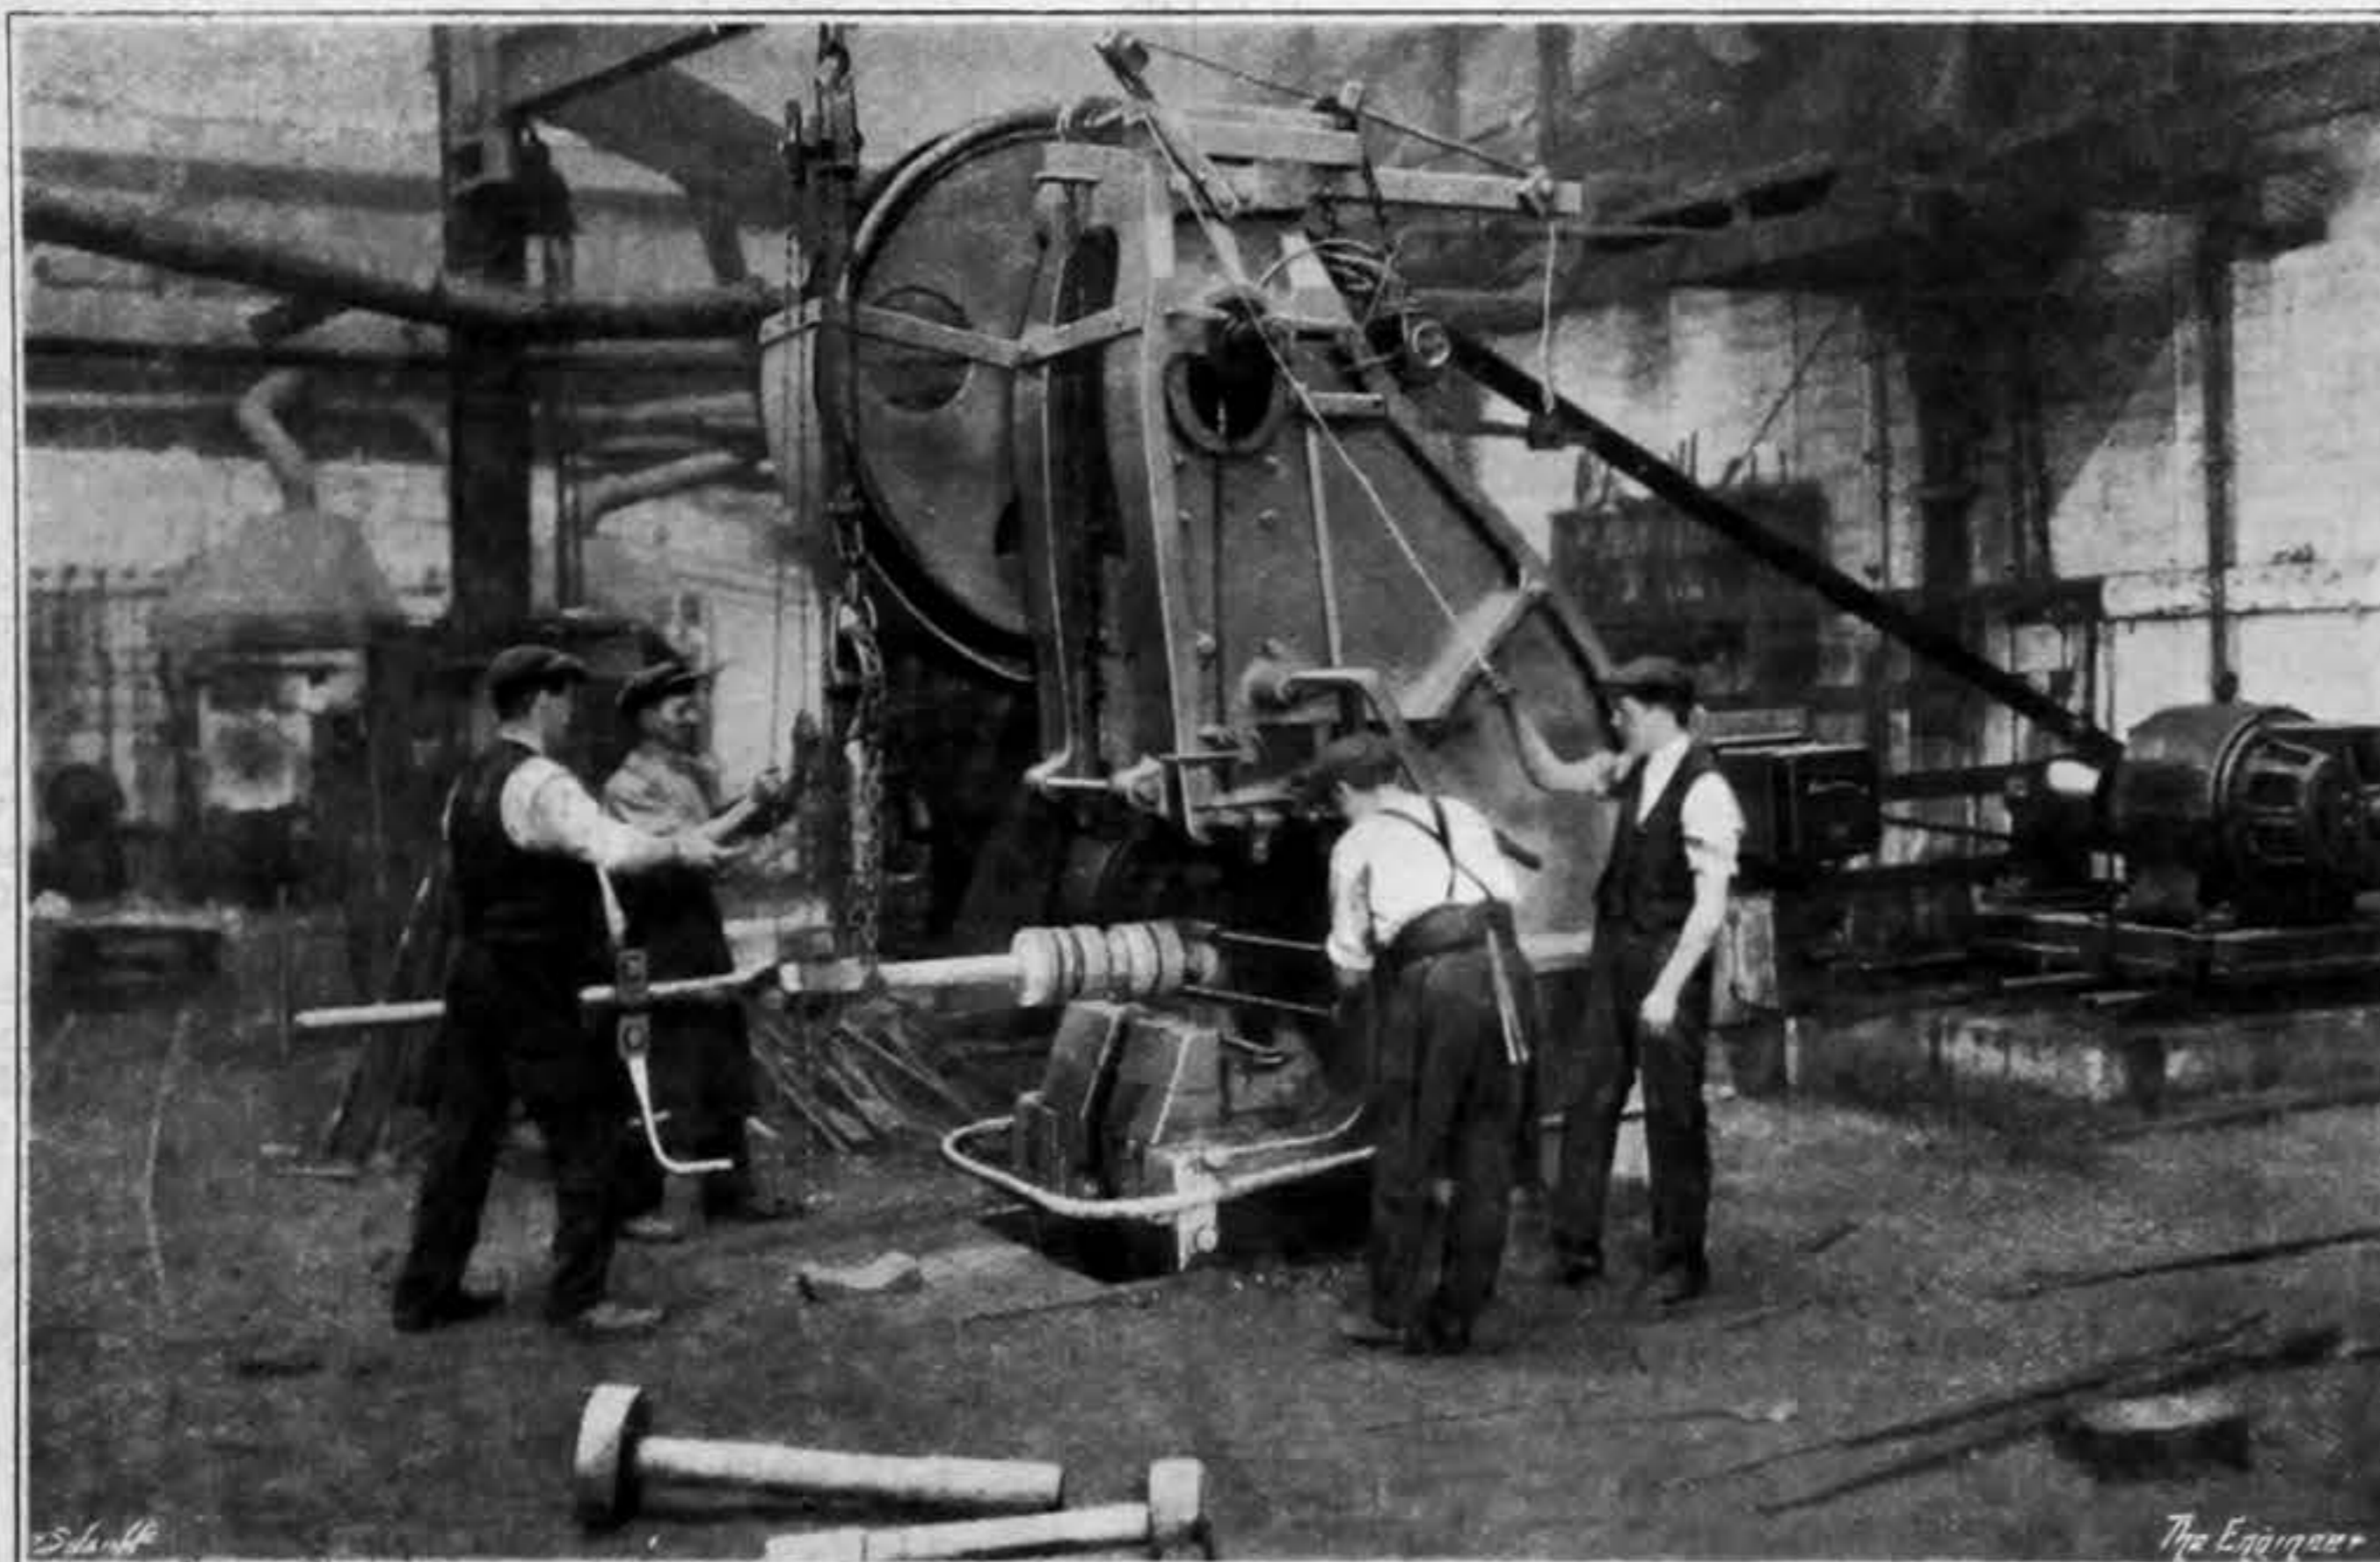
HAMMER TYPE FORGING MACHINE—MASSEY
